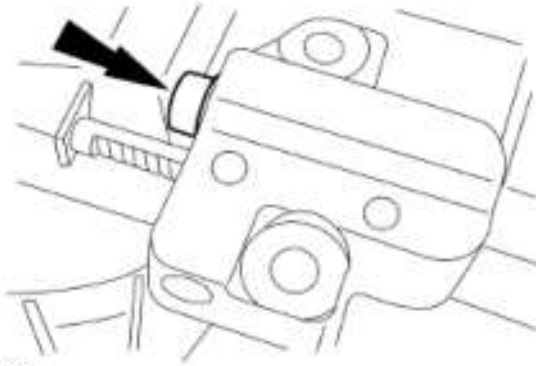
Locating Camshaft Drive Sprockets Bolts
